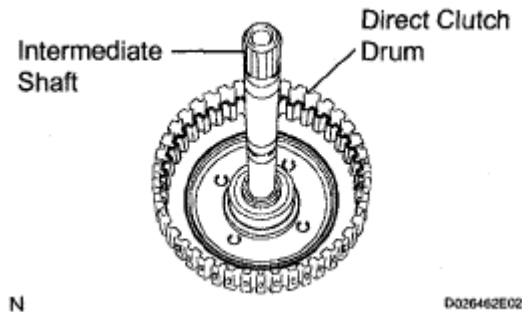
Identifying Direct Clutch Drum And Intermediate Shaft
